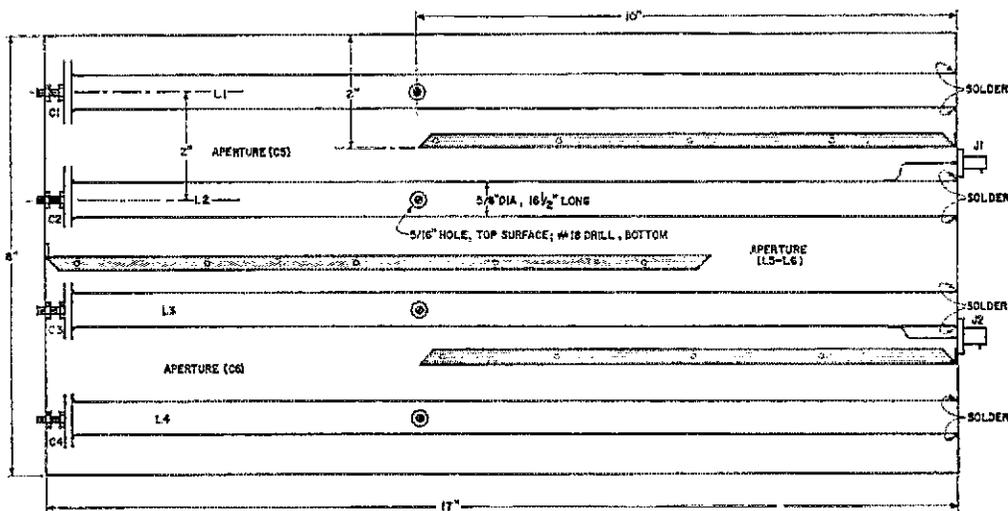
Principal details of the trap filter, designed for inclusion in an 8 by 17-inch chassis, or assembled from sheet metal as described. Assembly can be made longer, for lower-C tuned circuits and less critical tuning, if greater than standard chassis length is permissible.
